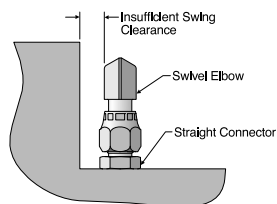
Swivel nut fitting used with straight connector in tight space
